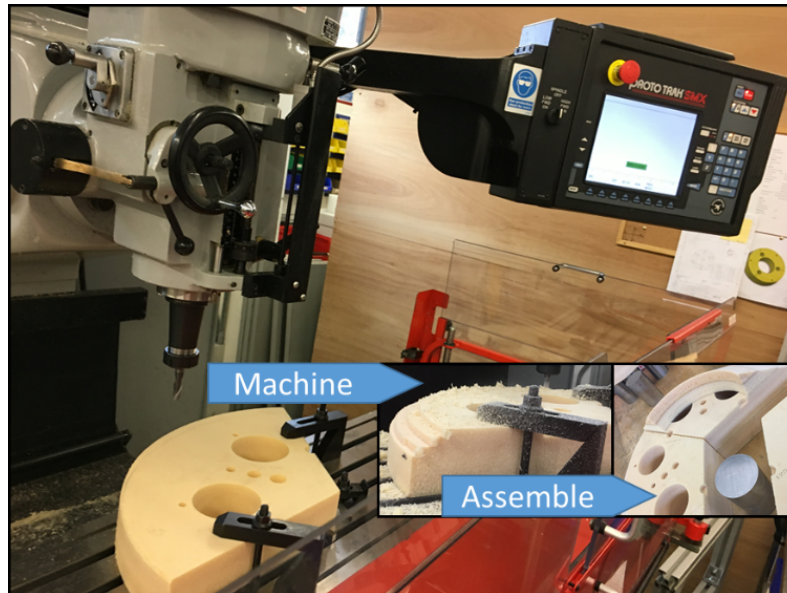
Milling machine ready to cut a piece, working on the frustum, and a view showing how some of the pieces were assembled.
